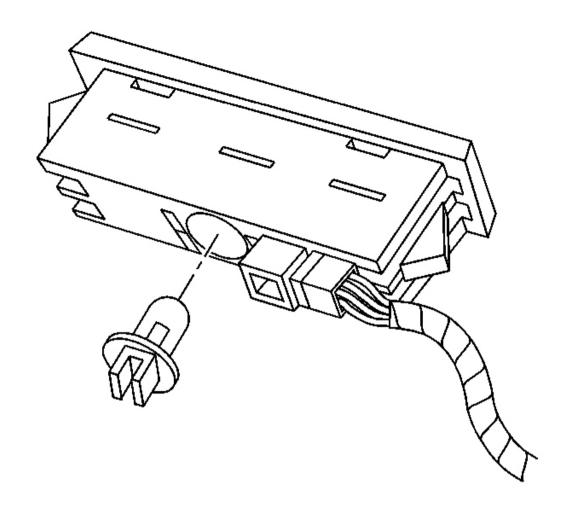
Bulb To Cargo Lamp Courtesy of GENERAL MOTORS CORP.
